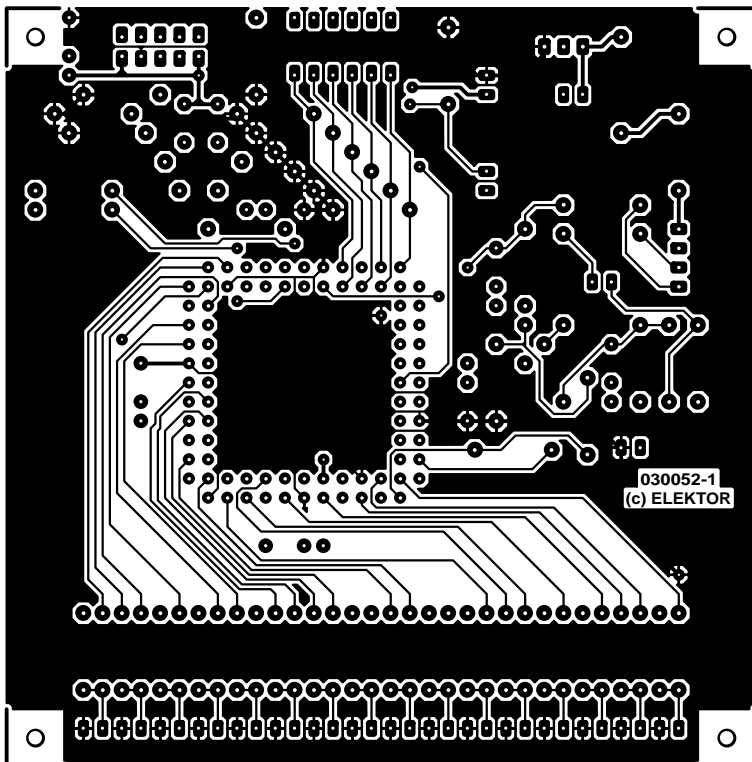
The double-sided PCB layout for the CPLD rev counter.
